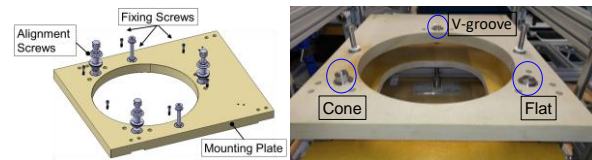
Left: Alignment screws and fixing bolts on the 'Mounting Base Plate'. Right: Photo of the 'Mounting Base Plate' showing also the three kinematic points.
